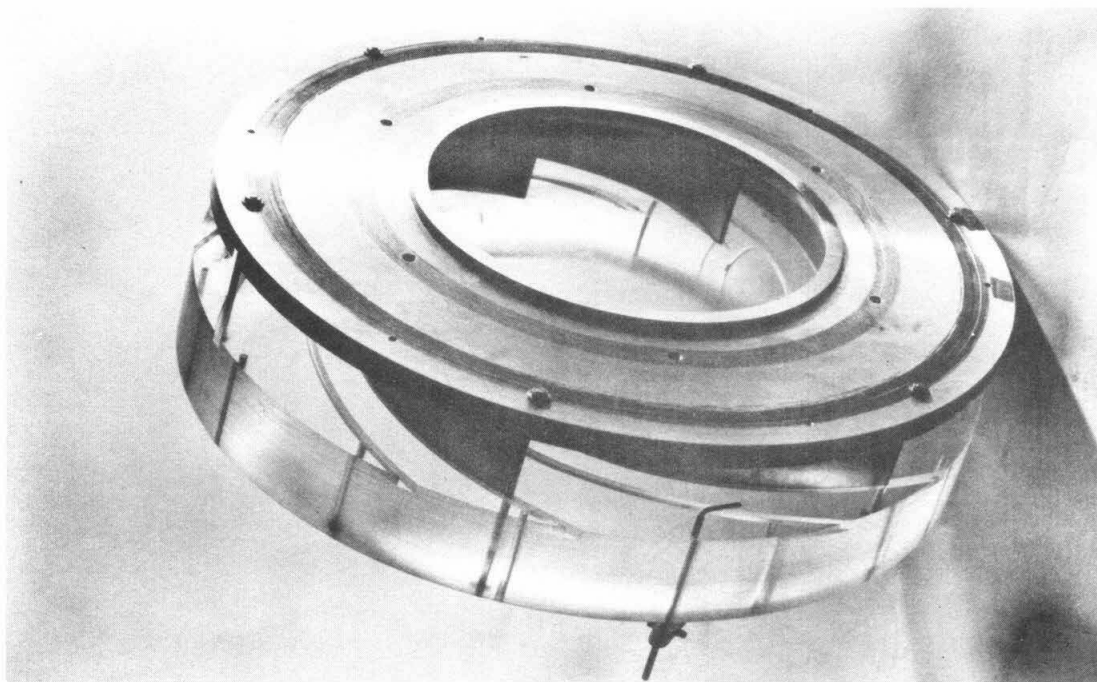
(b) Assembled view of 15° impeller with one relative total-head tube in position
